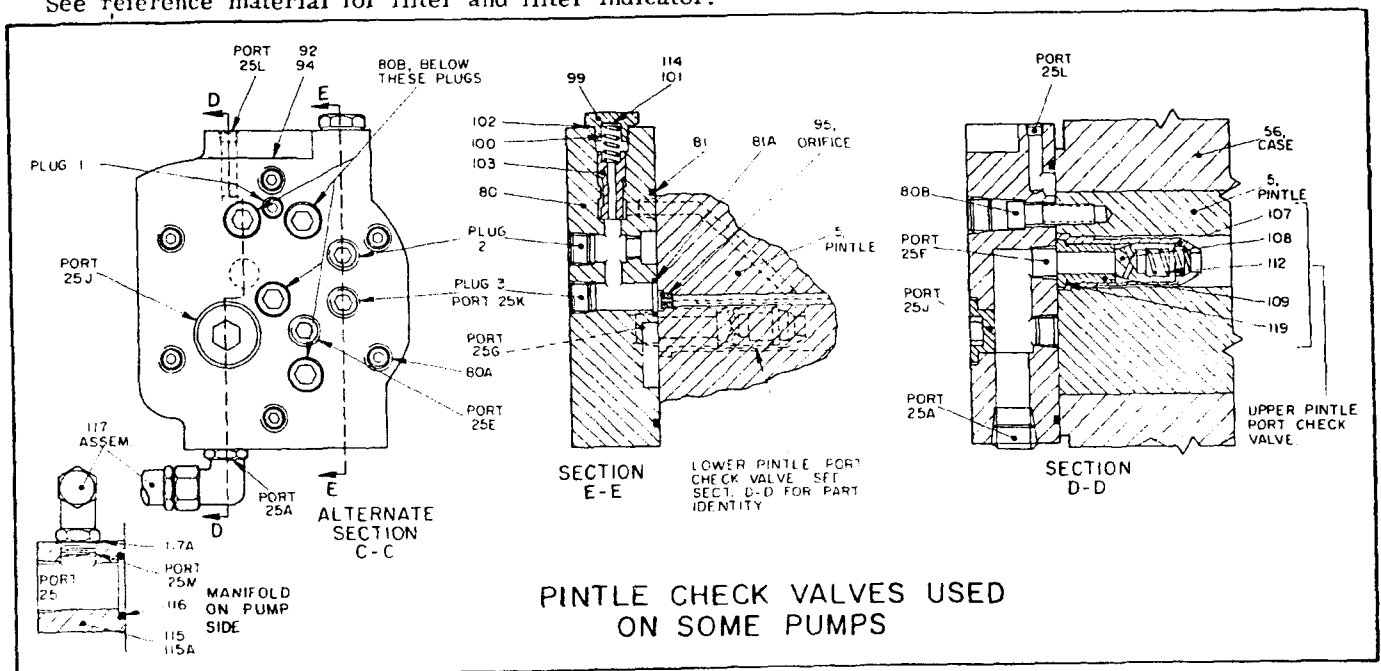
Parts Drawing, Oilgear Type "D" Units size 100 and larger. (DS-947917E) (503297E)
